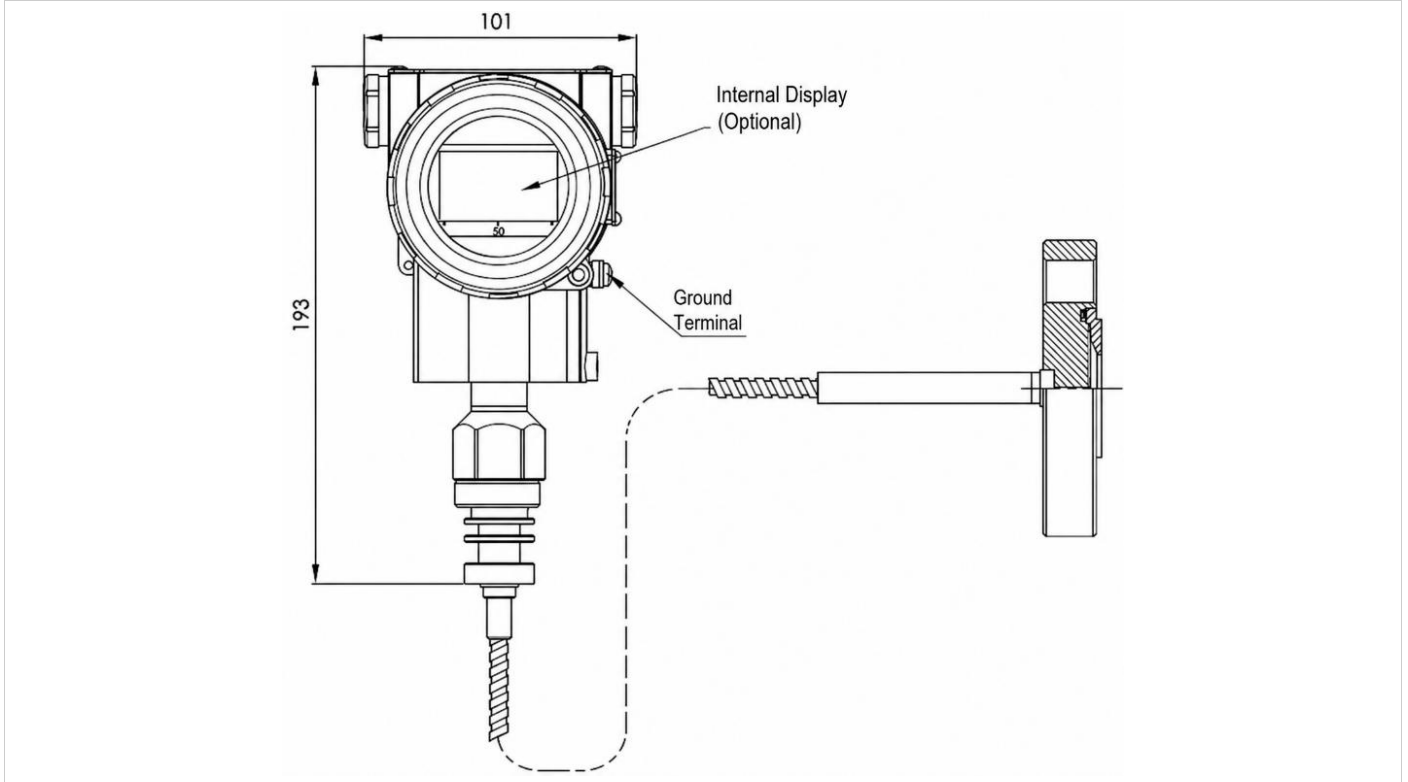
SX-PKYB: UN Type — Internal-Diaphragm Remote Seal, Direct Mount
